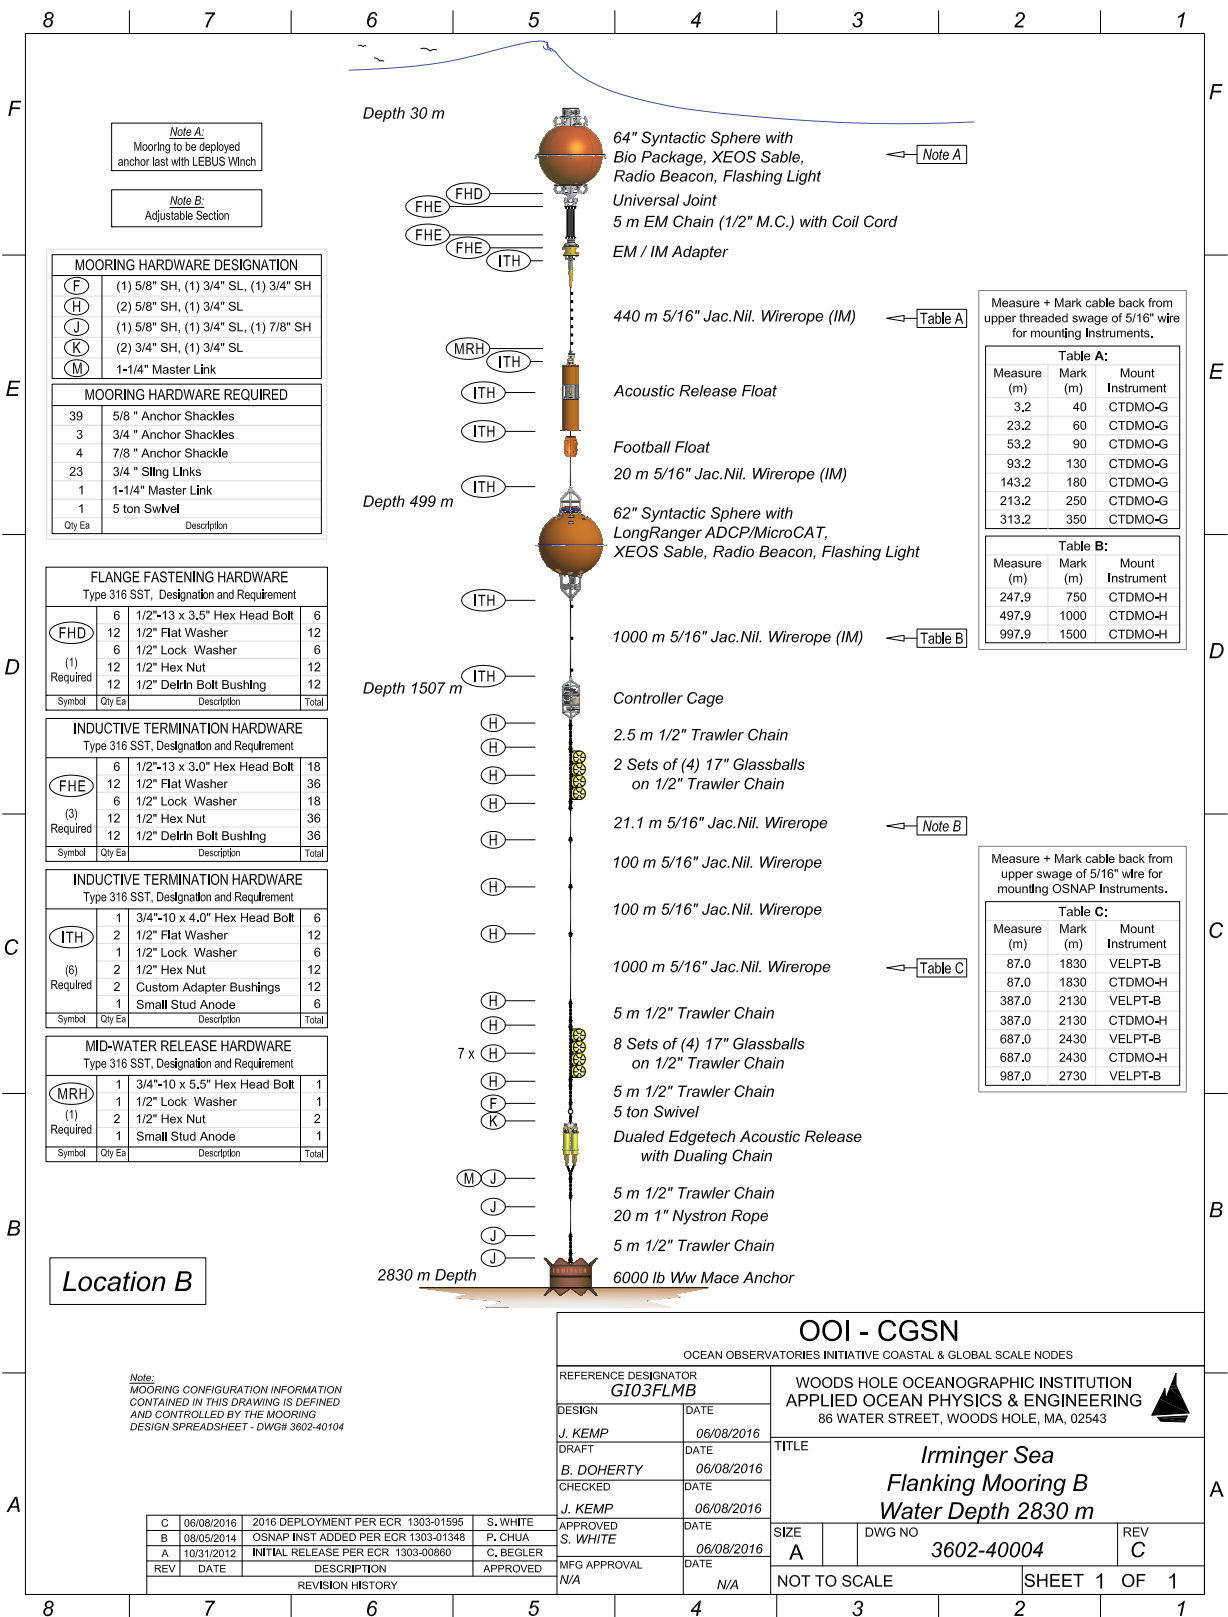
Irminger Sea Flanking Mooring B (GI03FLMB)
